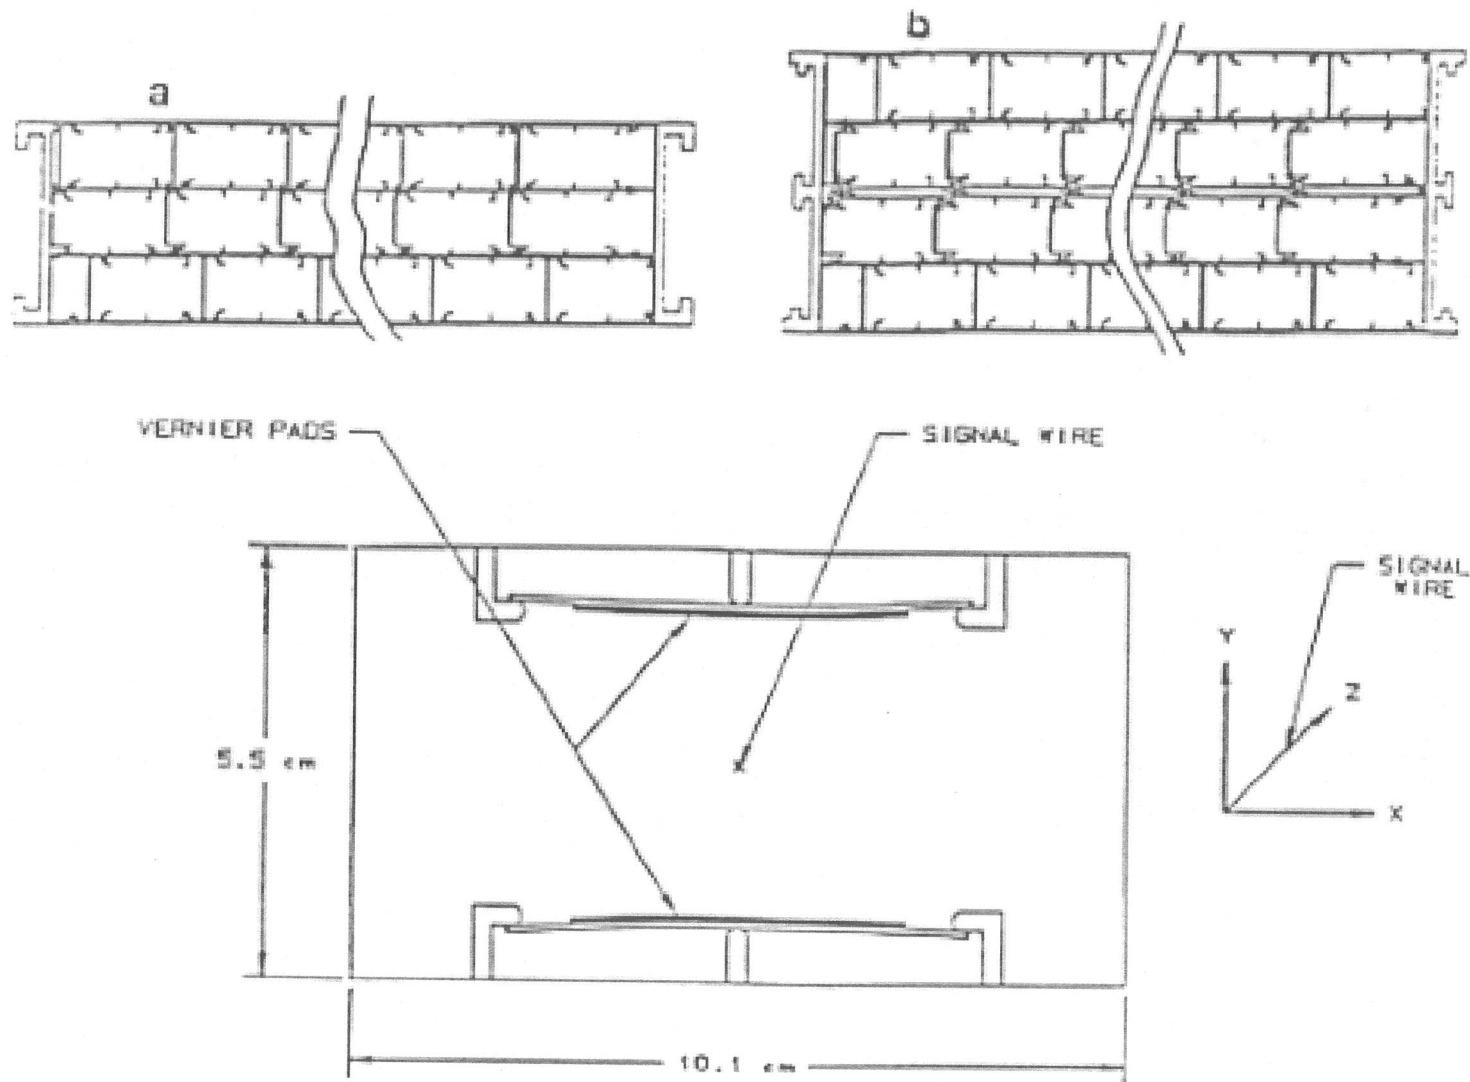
Wamus. Fig (a) is the end view of the 3-deck extrusion. Fig. (b) is the end view of the 4-deck extrusion. The larger figure shows the end view of a single cell, including the cathode pad.
